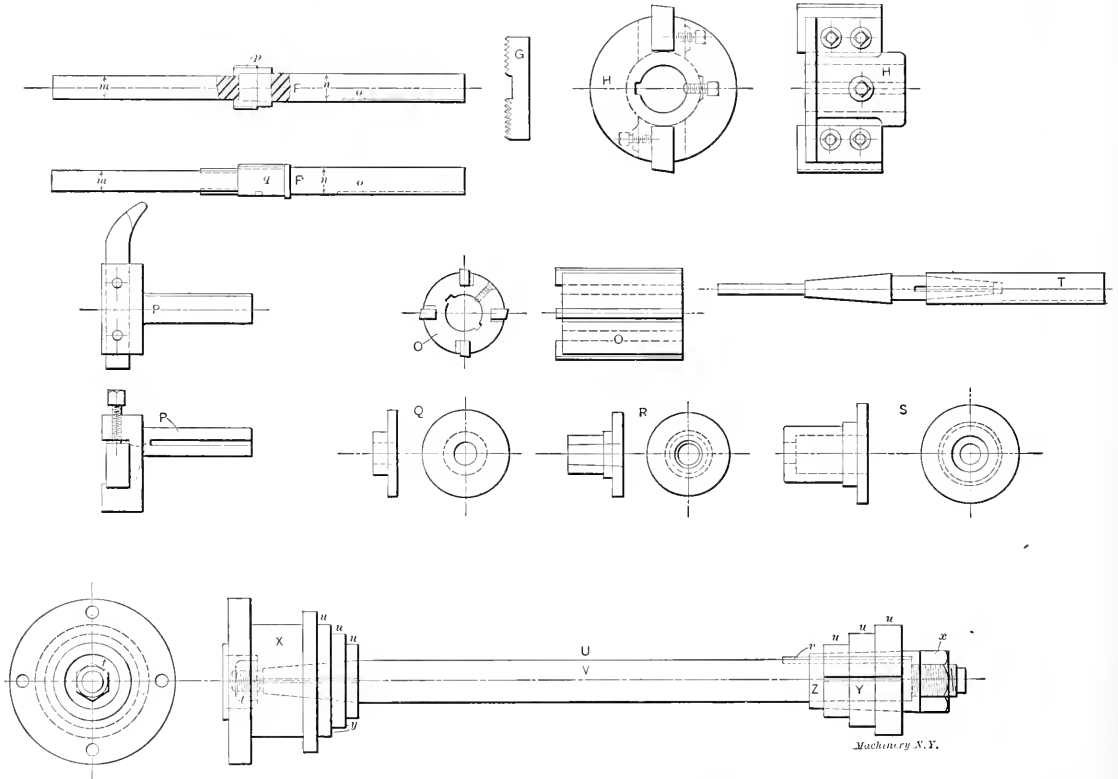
Tools used in a Specially Equipped Boring Lathe.
